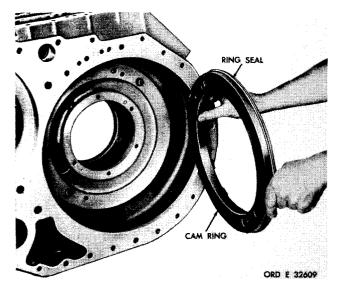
Removing (or installing) left-brake apply cam stationary ring
